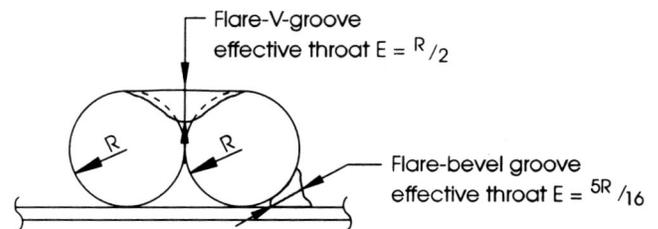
AISC Flare Weld Nomenclature (AISC, 1997; 1999a).
